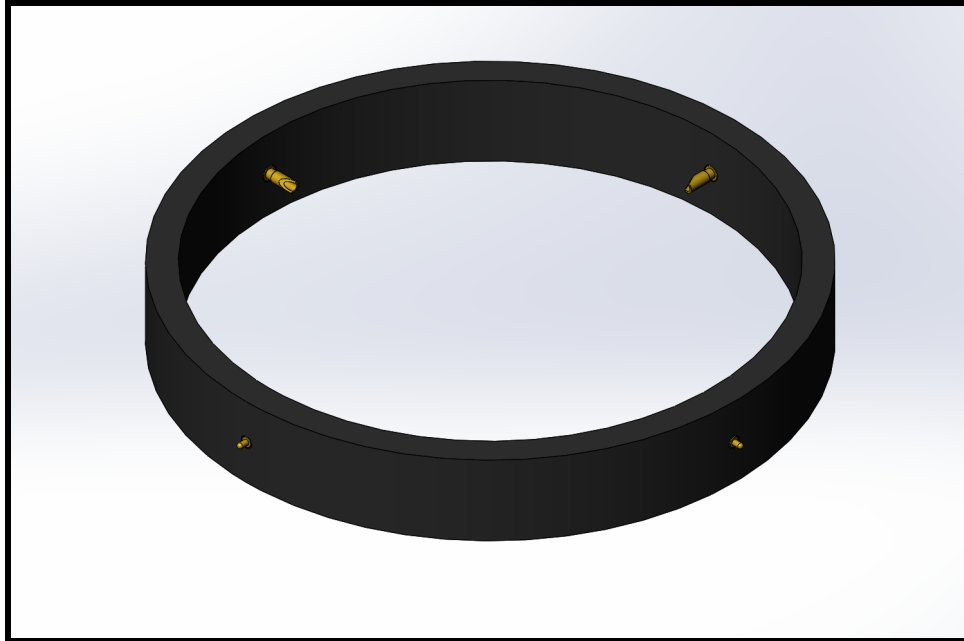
Pogo Contact Assembly with Four Contacts
